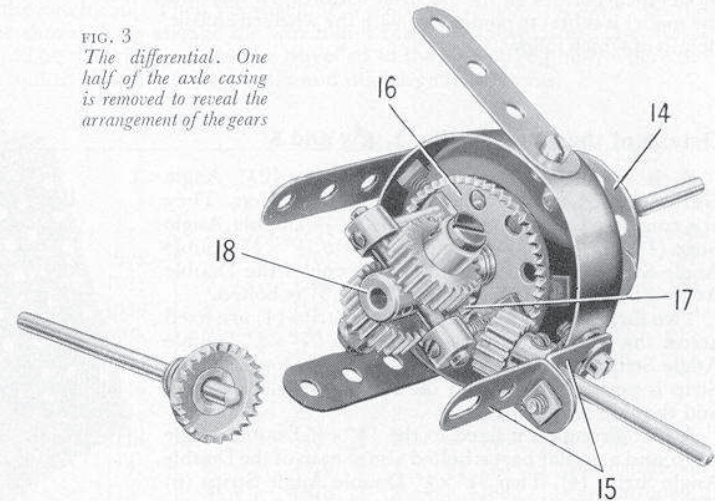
The differential. One half of the axle casing is removed to reveal the arrangement of the gears
